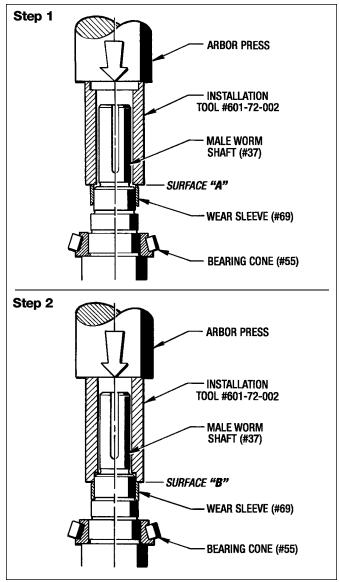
Installing Wear Sleeve on Male Worm Shaft
